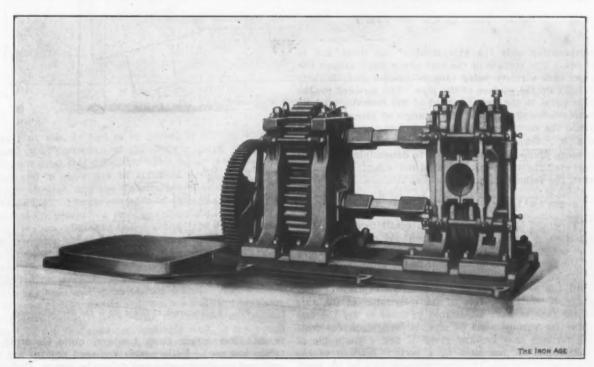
Sizing Rolls, with Separate Pinion Housings, 4-Inch Pipe.
